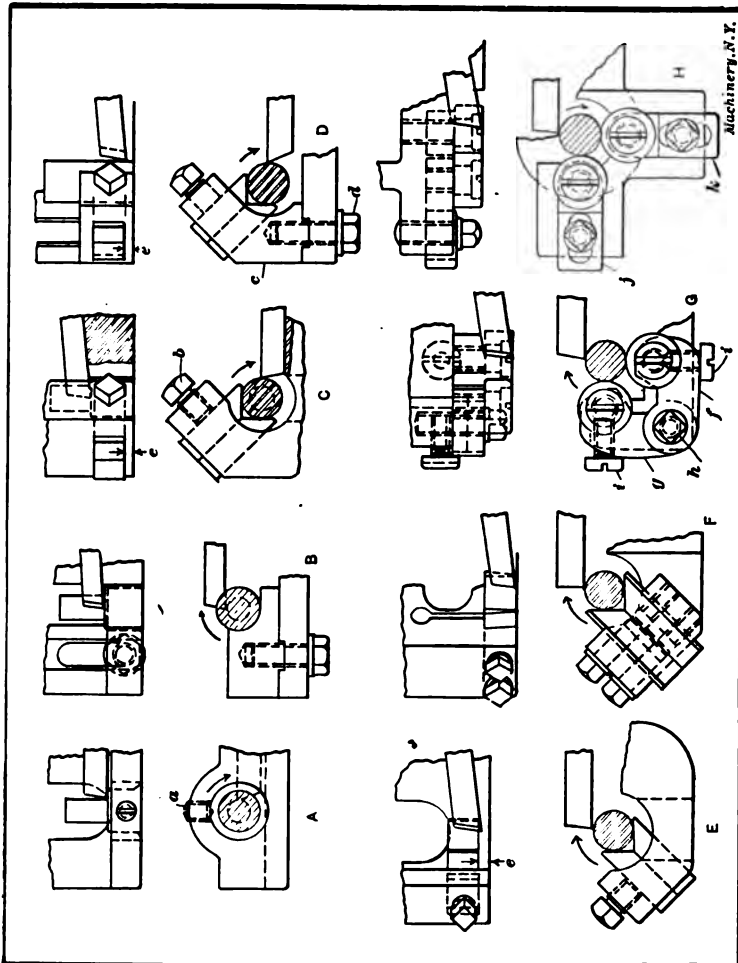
Methods of Holding and Adjusting Box-tool Supports
